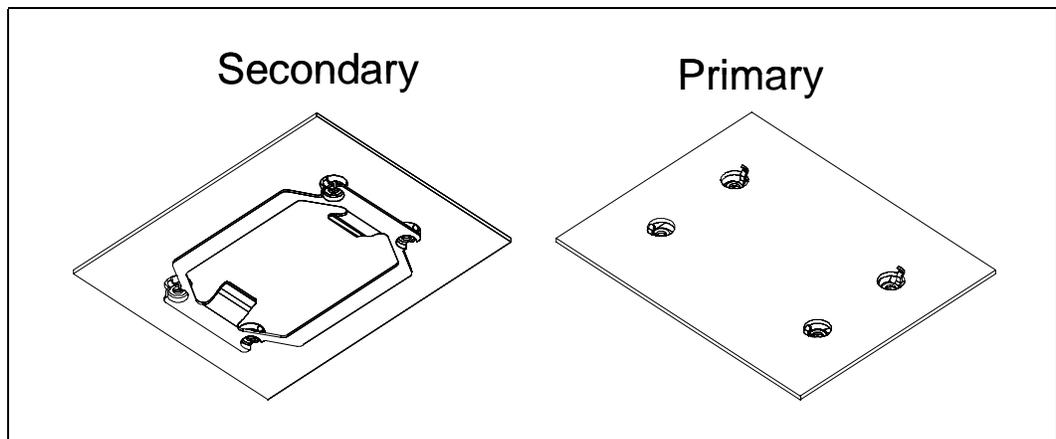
Isometric View of CEK Spring Attachment to the Base Board
